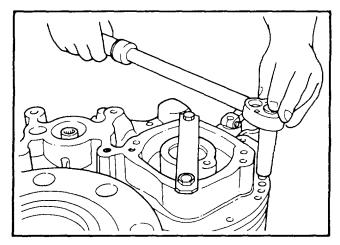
Removing or installing capscrew on manifold assembly.
